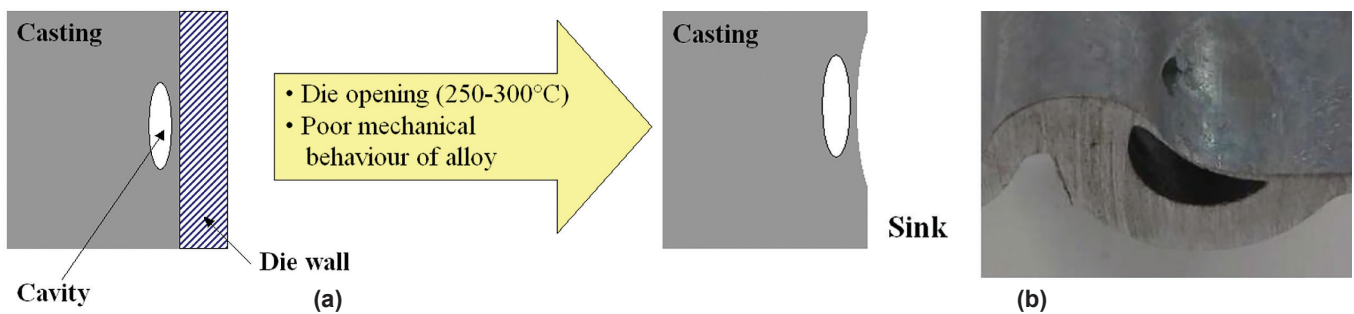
(a) Draft of sink formation and (b) sink appearance on the external surface of casting.¹²
